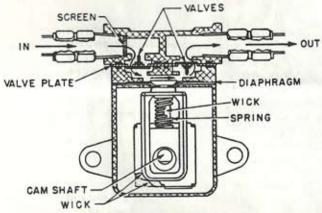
HEATER FUEL PUMP SECTIONAL VIEW
